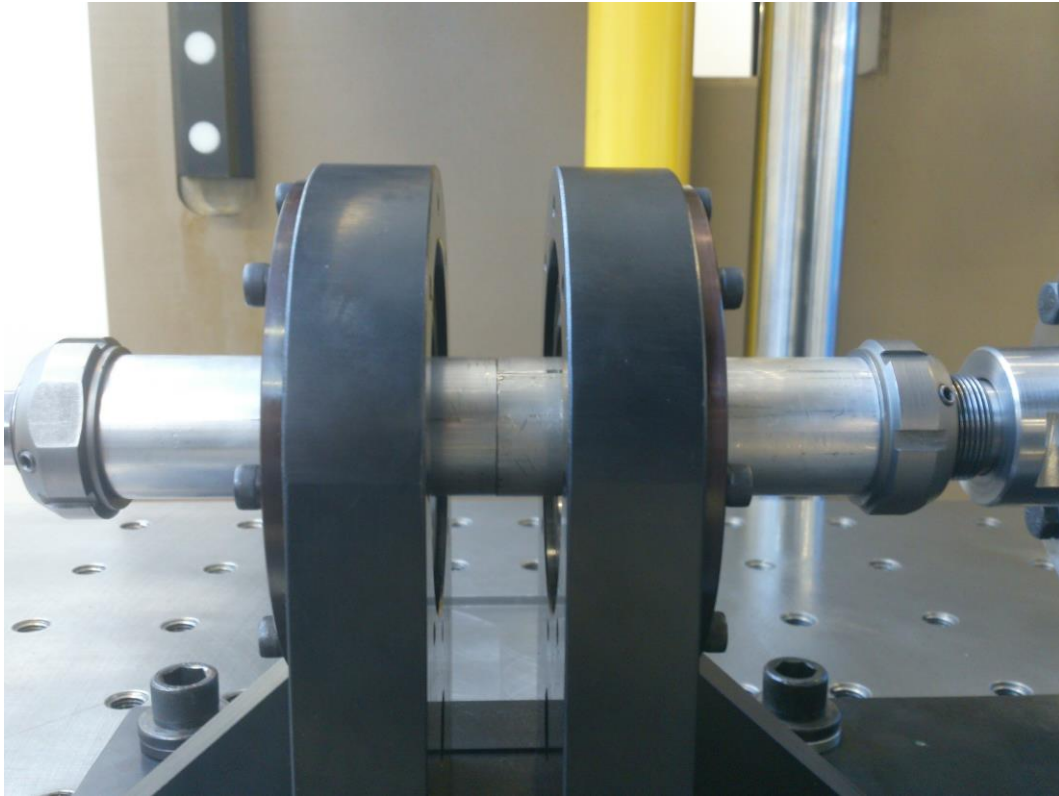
Two sections of tube ready for welding in the clamping system.
